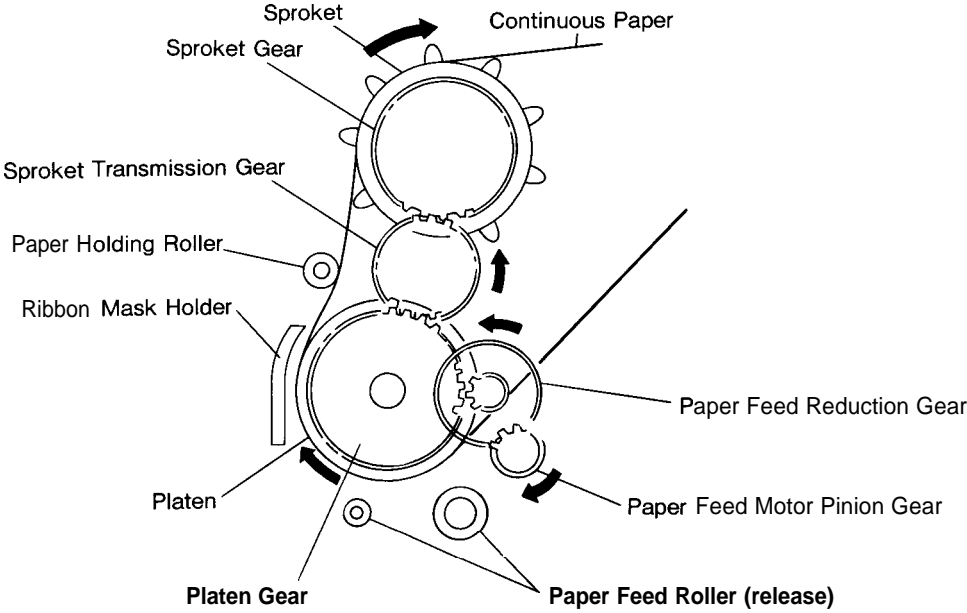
Pull Sprocket Feeding Gear Arrangement and Paper Path
